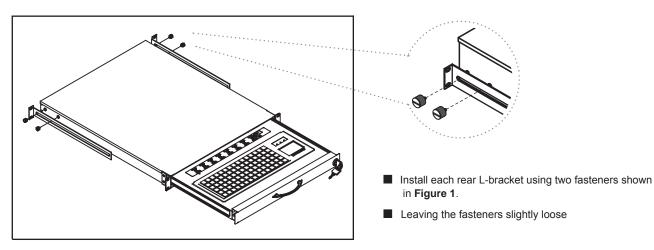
Installing the rear L-bracket to the LCD keyboard drawer.
